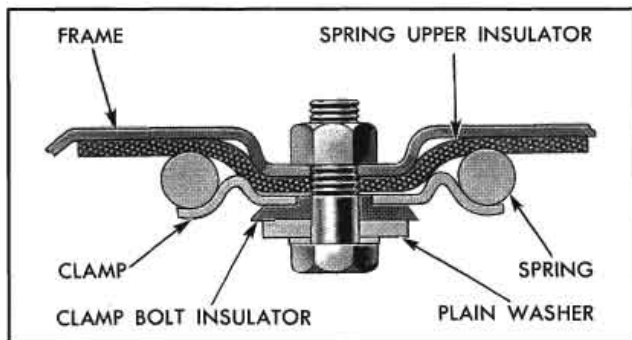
Cross Section of Upper Rear Spring Assembly
